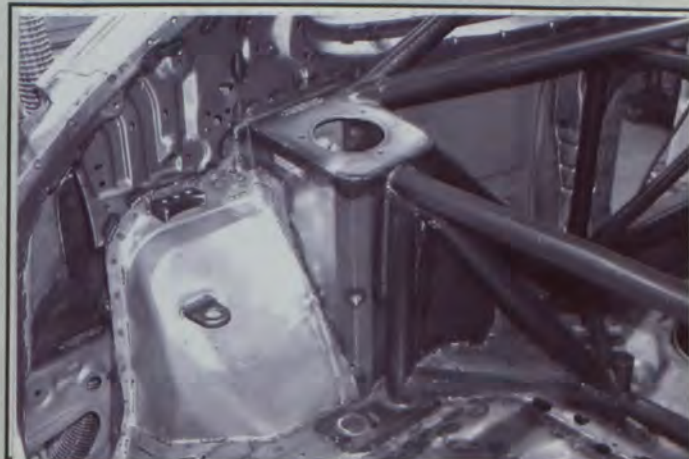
FRONT LATERAL TO ROOF (RIGHT)
